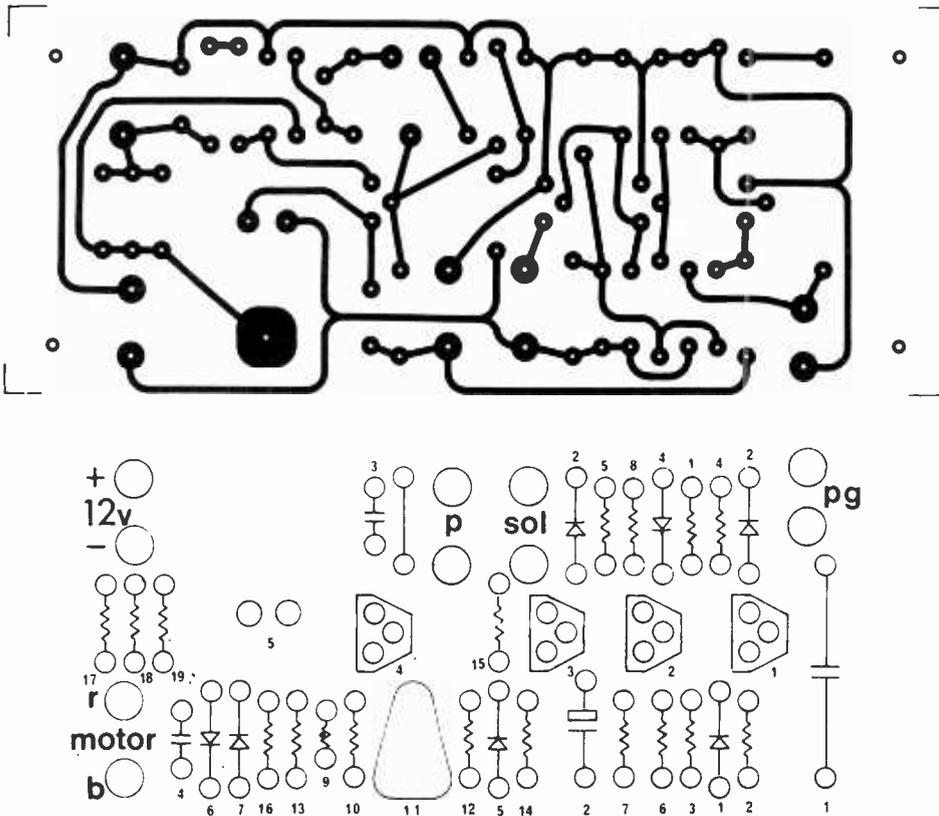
A suggested, actual-size layout for the controller. The layout and modifications to the speed control circuit are due to Mr A. H. Milligan.
